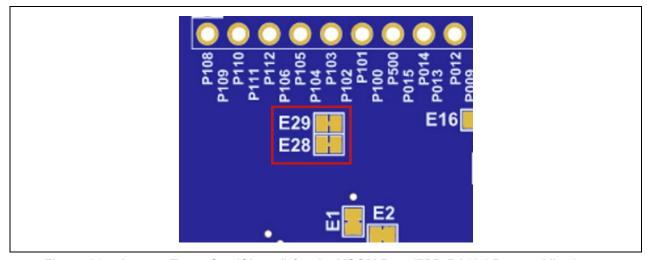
Jumper Trace Cut (Closed) for the VCOM Port (FPB-RA0L1 Bottom View)
